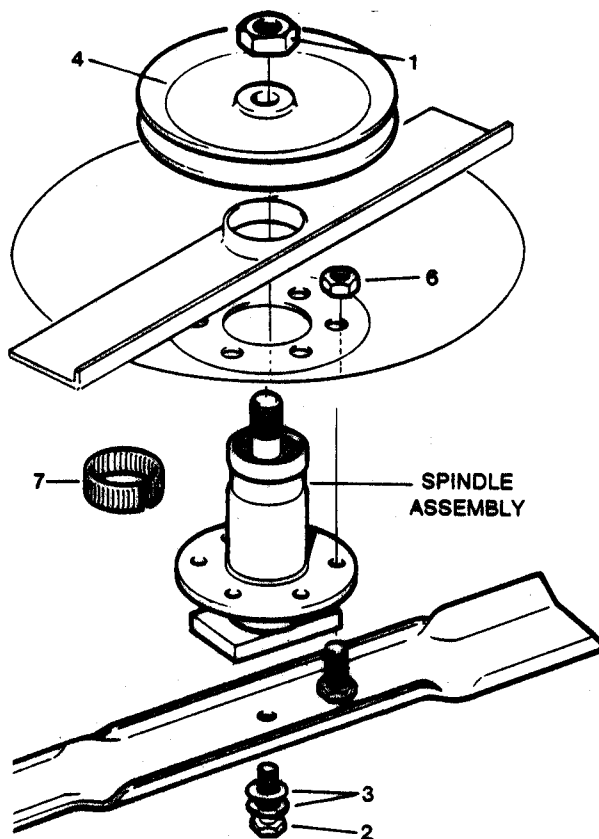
REPLACING SPINDLE ASSEMBLY
